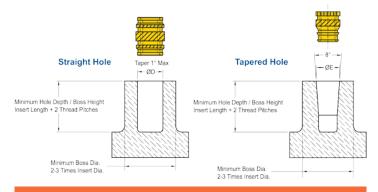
Moulded holes are preferable to drilled holes because of the strong, denser surface of the moulded hole. For straight holes, the taper should not exceed a 1° included angle and tapered holes should have an 8° included angle Tapered holes reduce installation time and ensure proper alignment of the insert to the hole. Easier release from the core pin is an additional benefit. Only tapered inserts should be used in tapered holes. The disadvantage is that tapered inserts are not symmetrical, and therefore must be oriented prior to installation.
